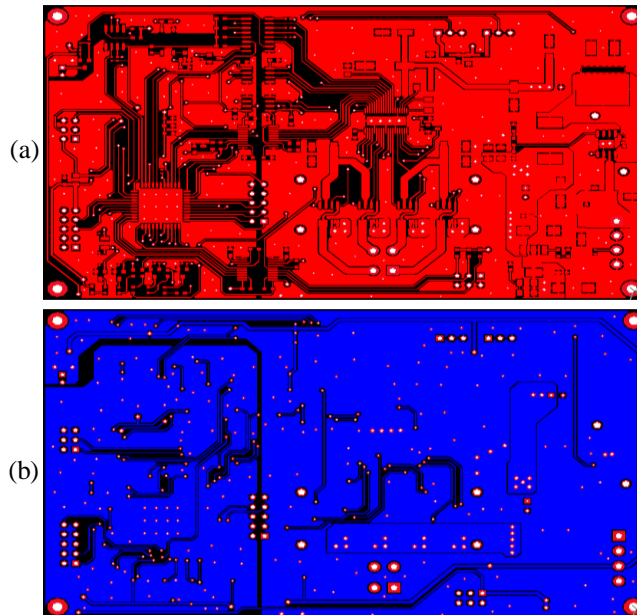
PCB layout of vertical direction controlling unit. (a). Top layer (b). Bottom layer
